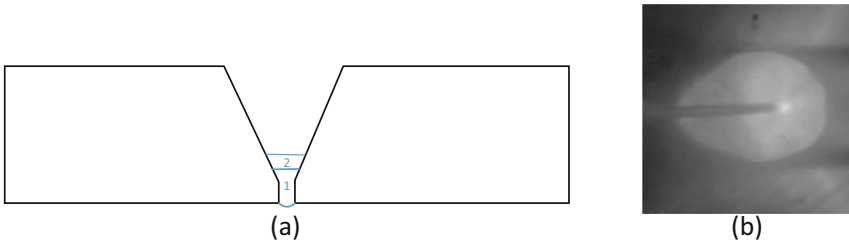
(a) Schematic diagram of weld bead filling. (b) (a) corresponding molten pool image.
